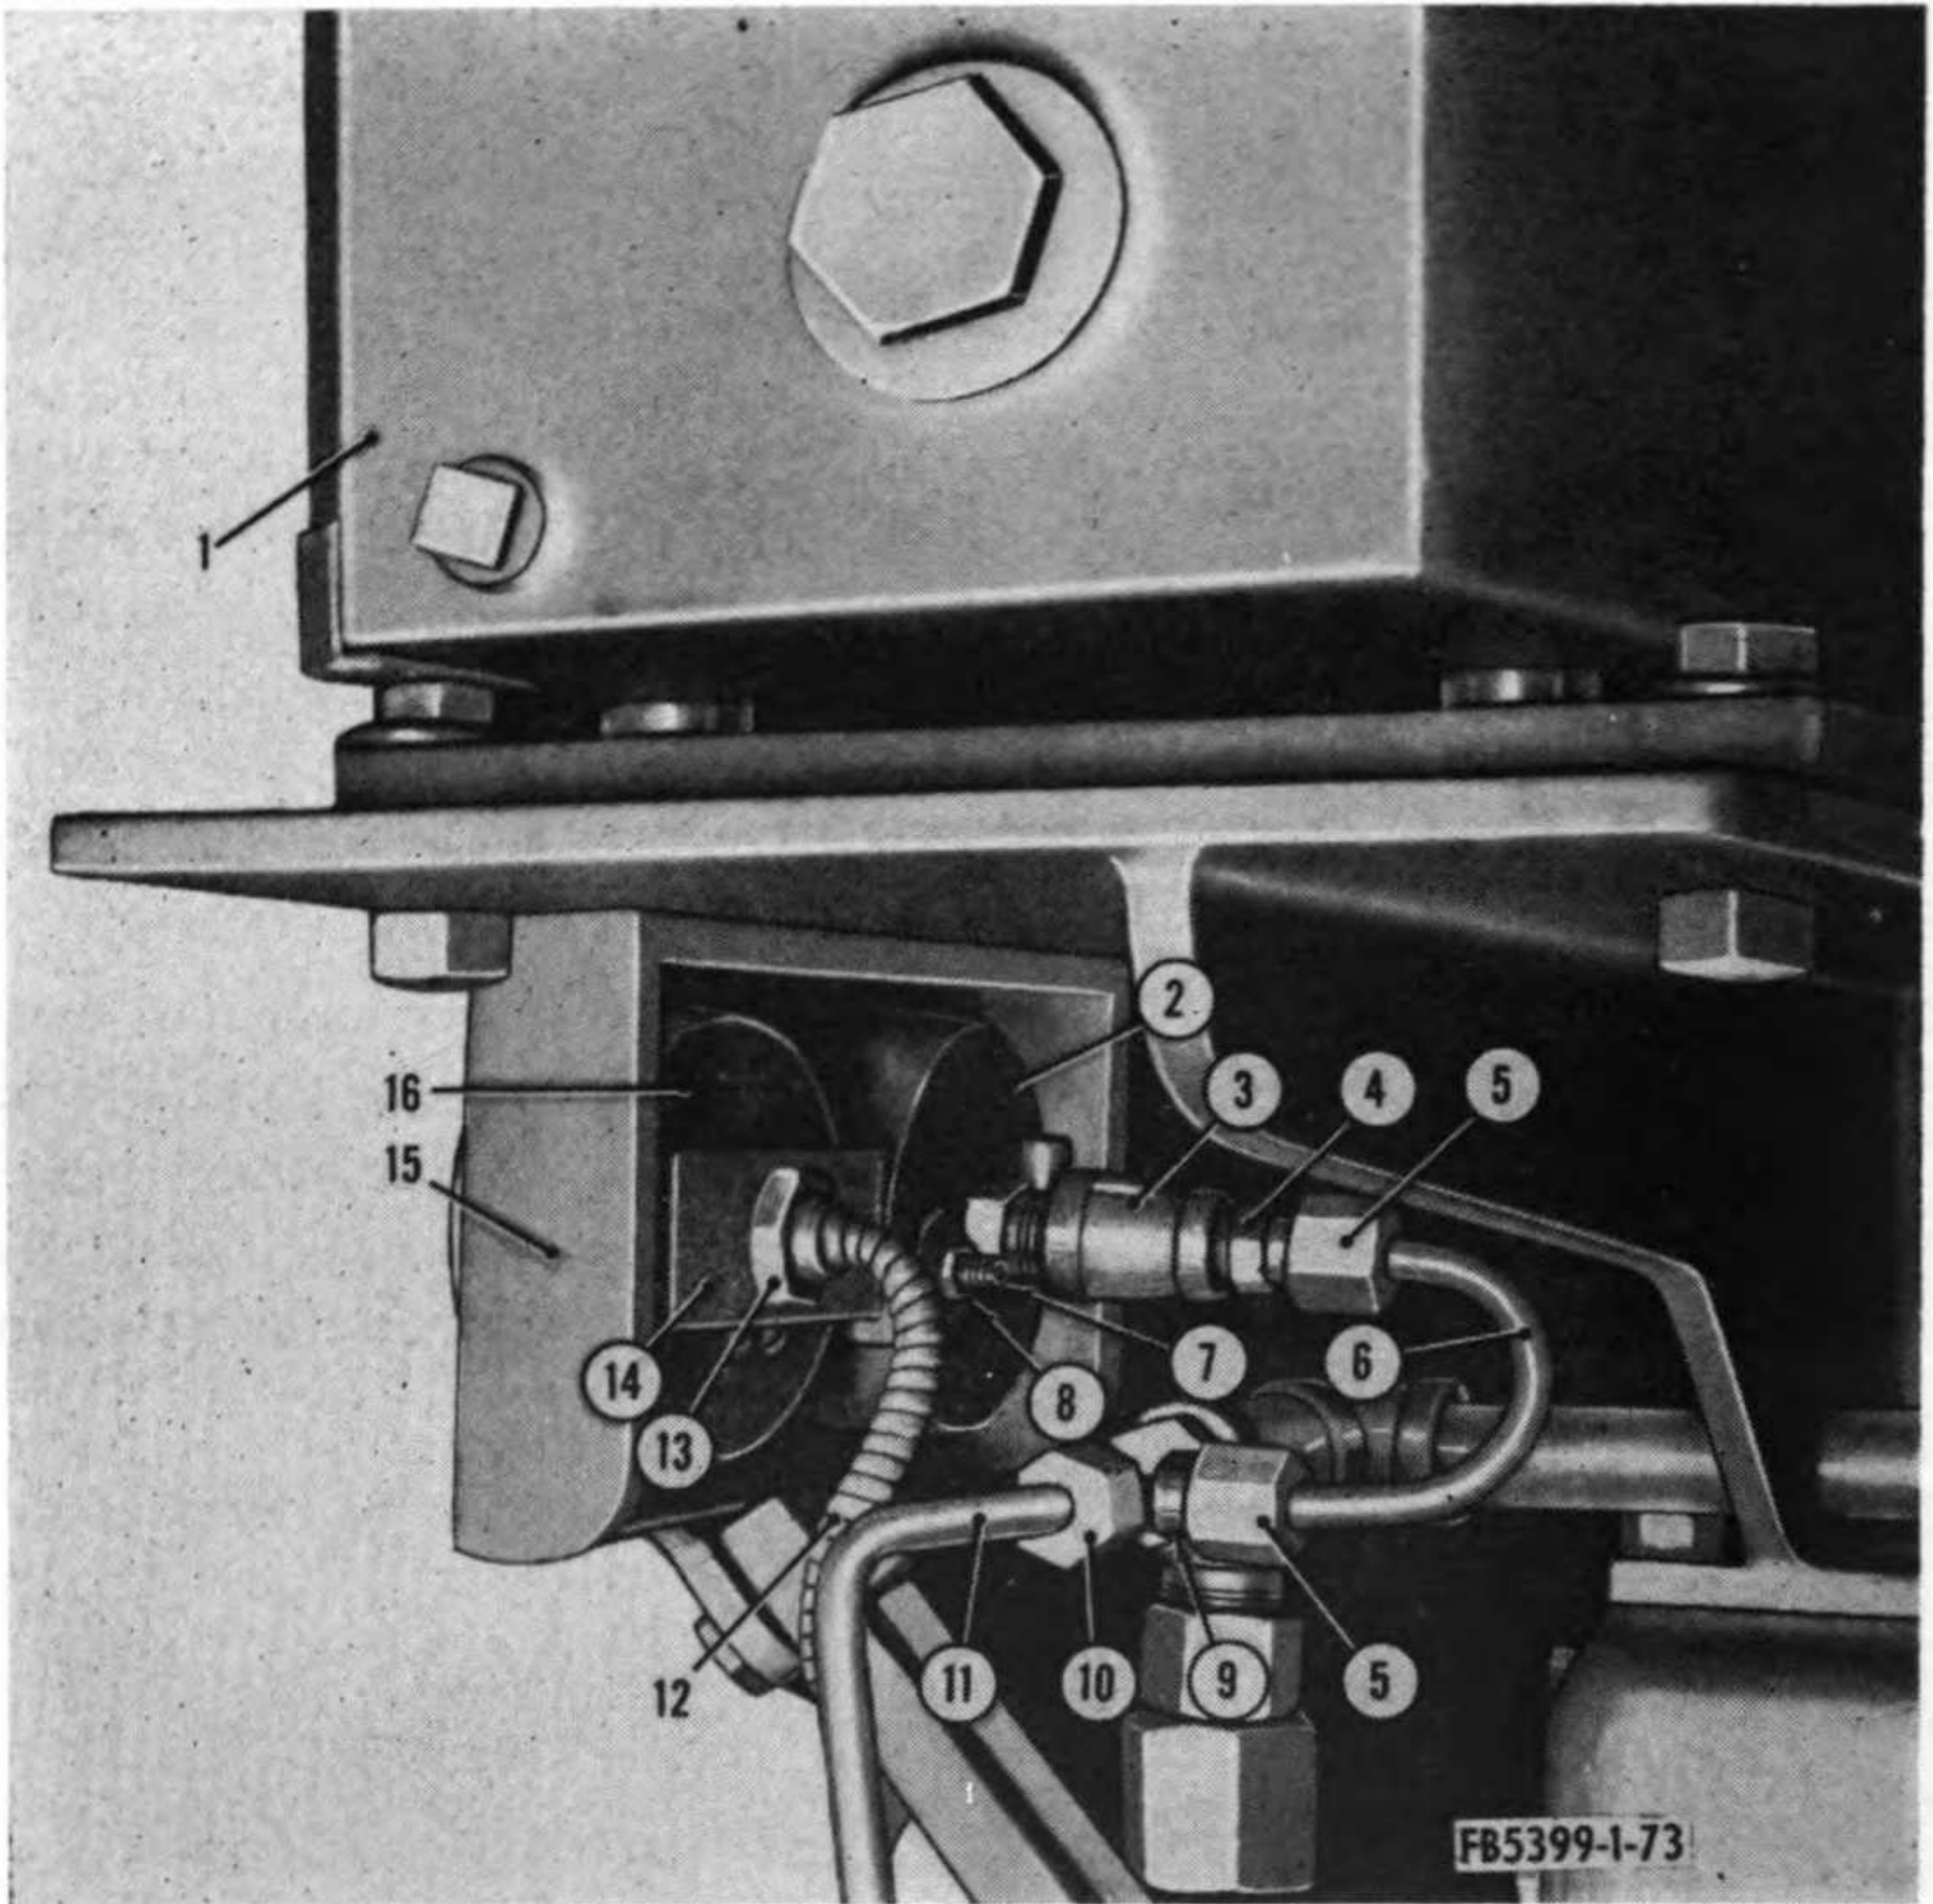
Drier assembly dessiccant and piping removal and installation points.
